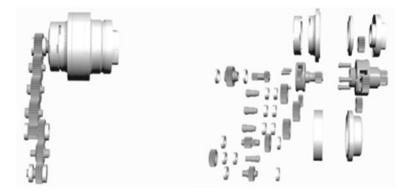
Assembling and disassembling diagram of cutting part transmission gear
